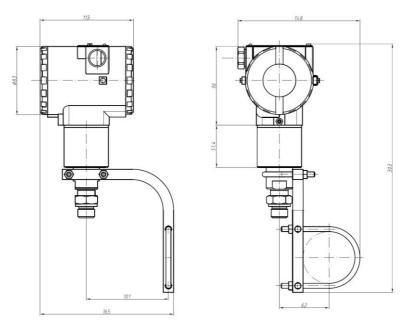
Mounting AMZ 5450 to a 2" pipe, angle bracket
